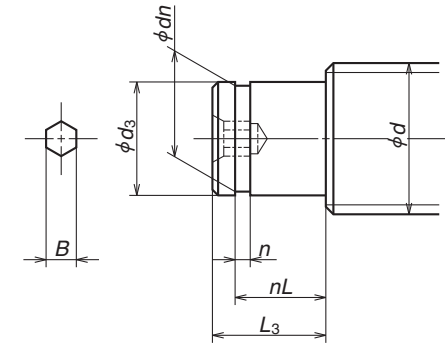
Shaft end configuration of R model (opposite the drive side)
